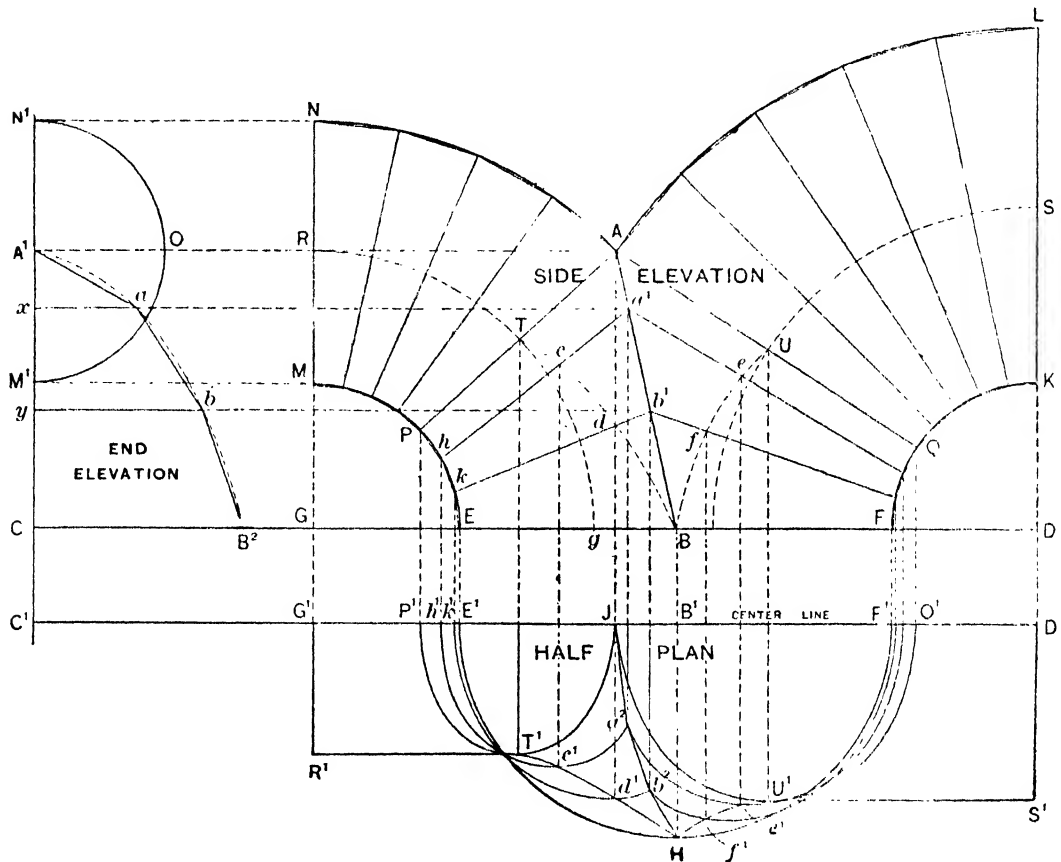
Complete Drawings of Double Elbow shown in Fig. 87. One eighth Full Size
